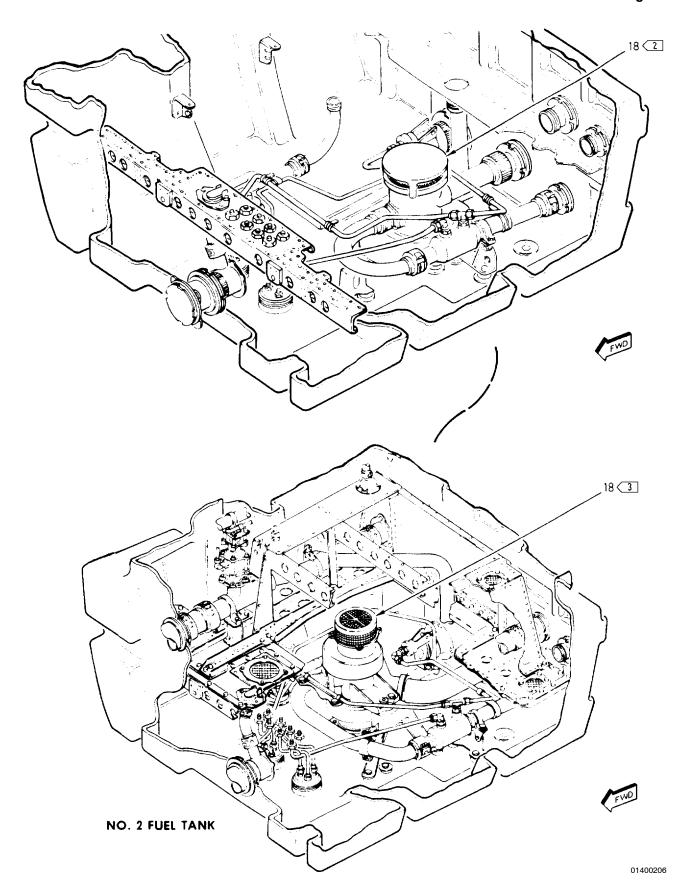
Engine Fuel Supply System Component Locator (Sheet 6)
